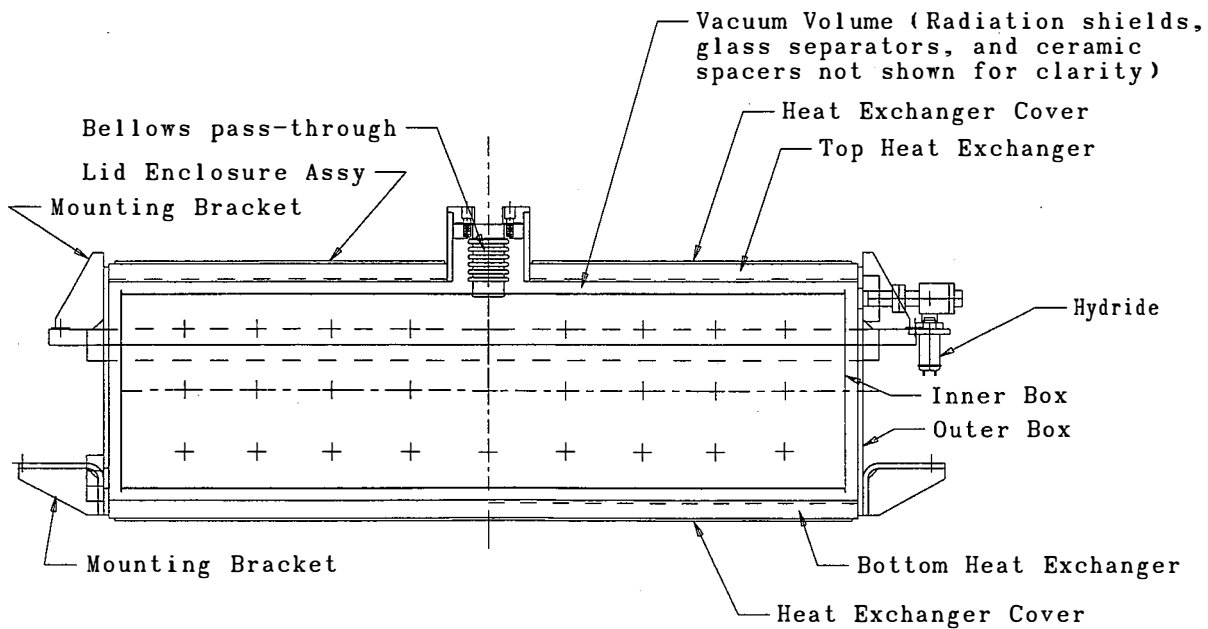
SIDE-VIEW DRAWING OF FSTA2
